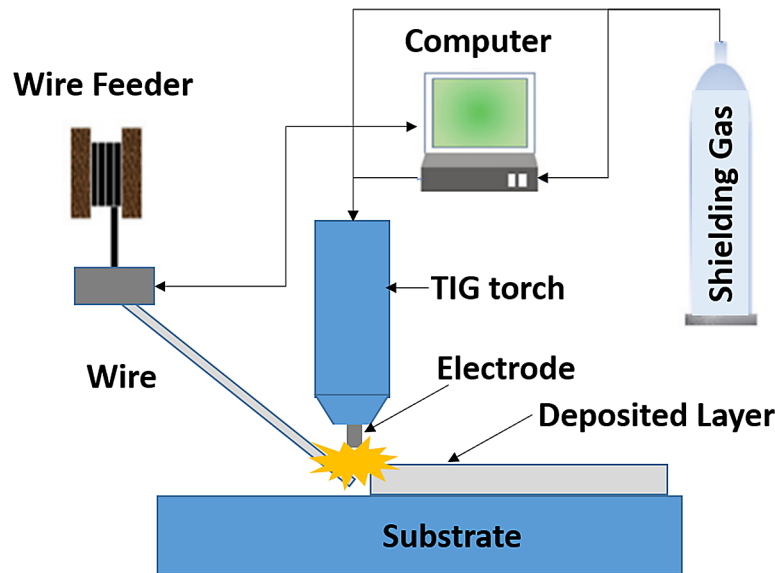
Conventional TIG welding setup for WAAM process.
